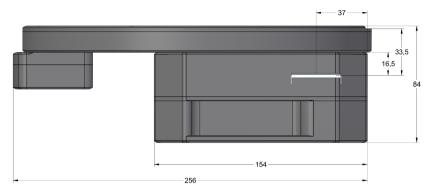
G4 camera head with standard cooling and "L" size external filter wheel side view
